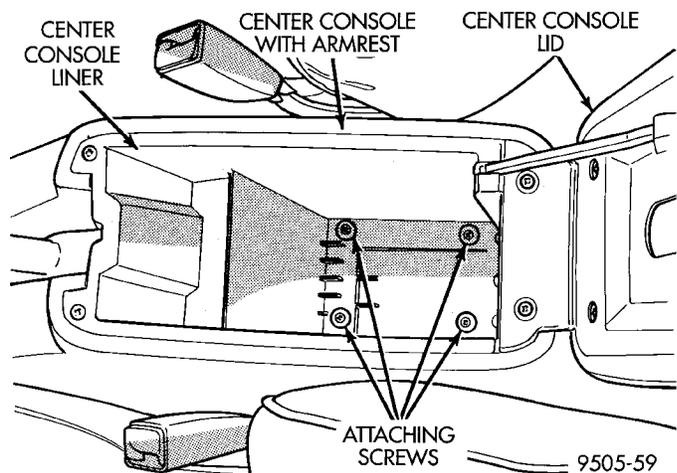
Attaching Screws At Rear Of Center Console With Arm Rest
